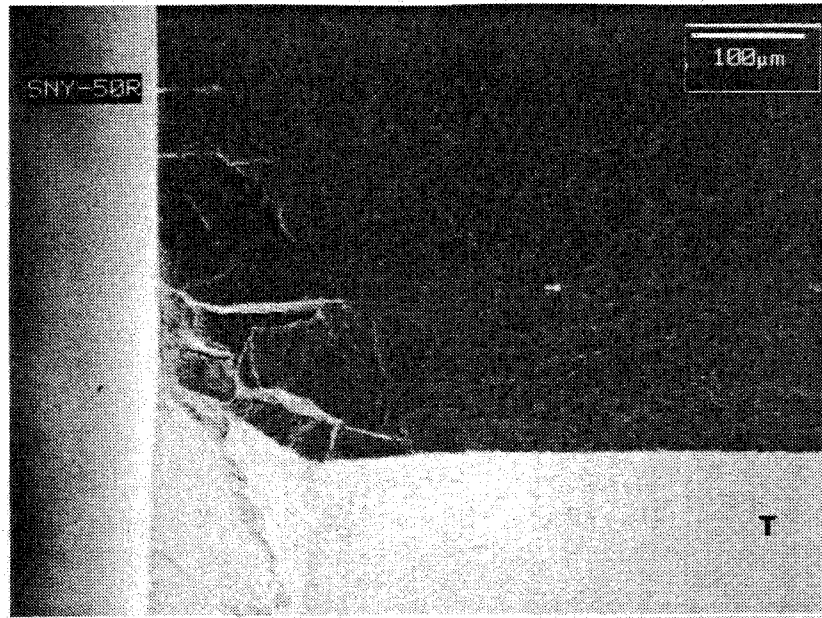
Example of Machining Damage in Specimen 5: Silicon Nitride. Mating halves of the primary fracture surface are shown. "T" denotes the tensile surface.
